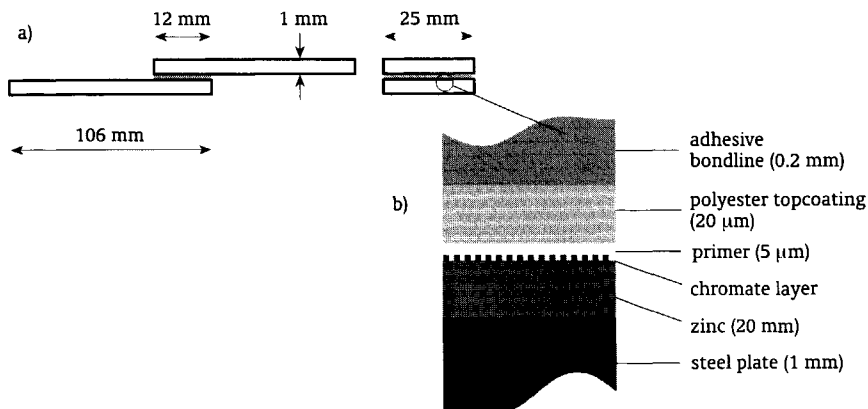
Studied overlap joints: a) geometry, b) cross-section coating
